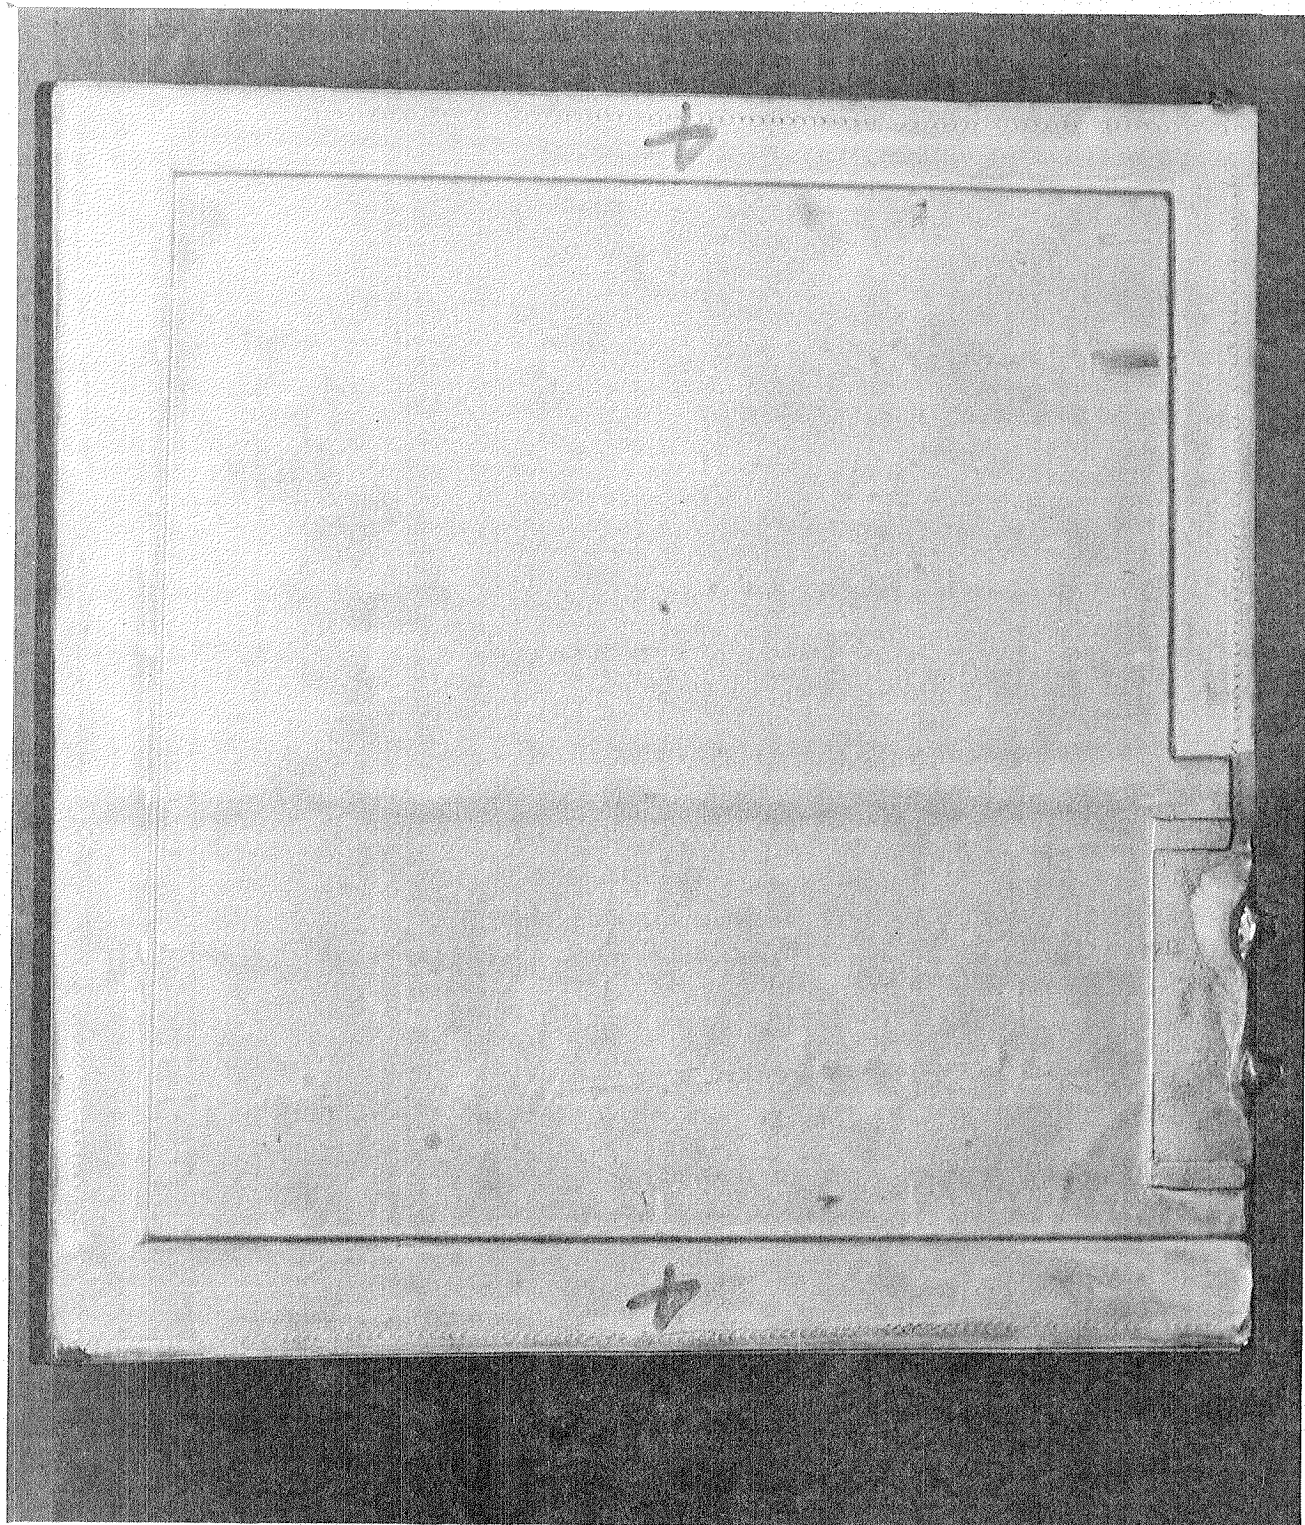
PANEL NO. 4 TOP FACE SHEET
